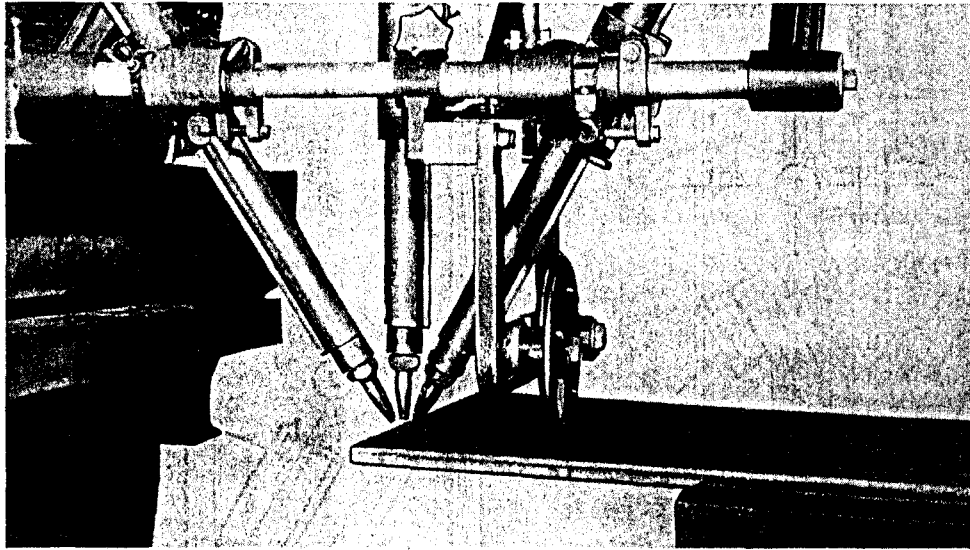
Mechanized Cutting Arrangement for Beveling a Plate Edge
